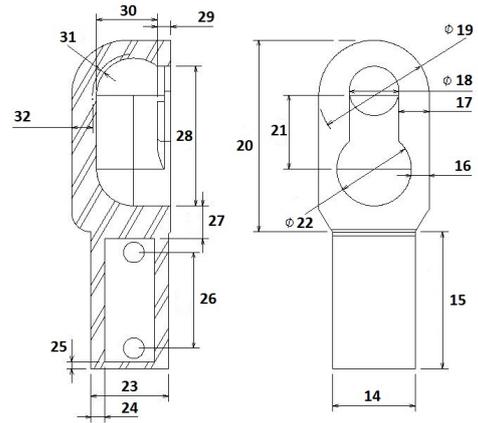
Dimension numbering of the socket, left side view, right front view
